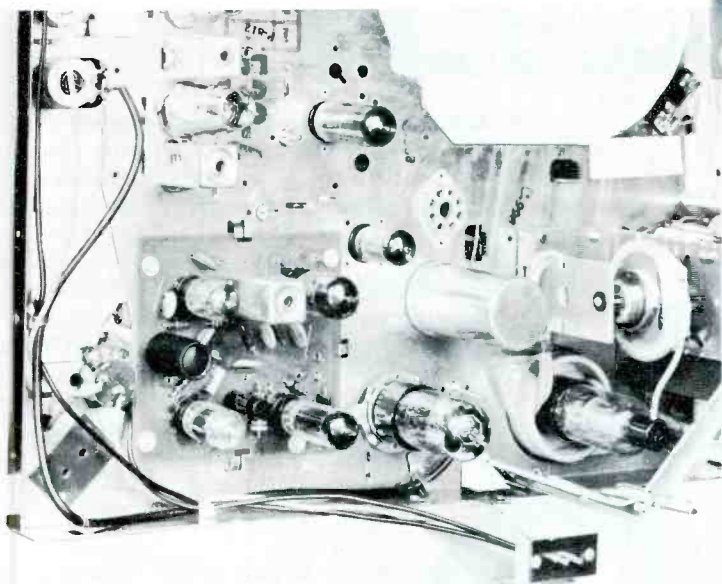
Receiver in Which Limited Use of Printed Boards Is Made.
